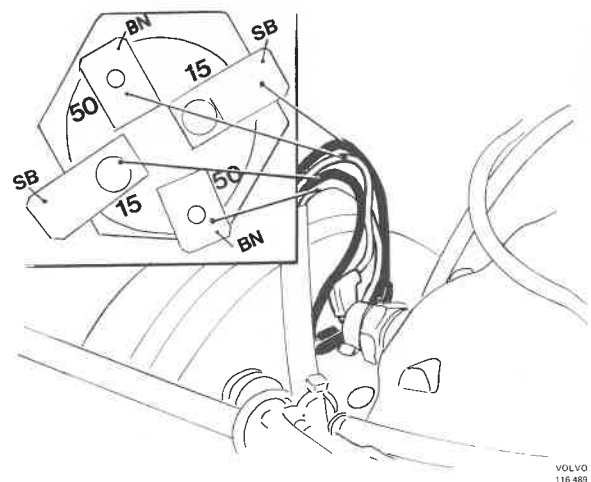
Front-wheel drive contact, with auxiliary gearbox
